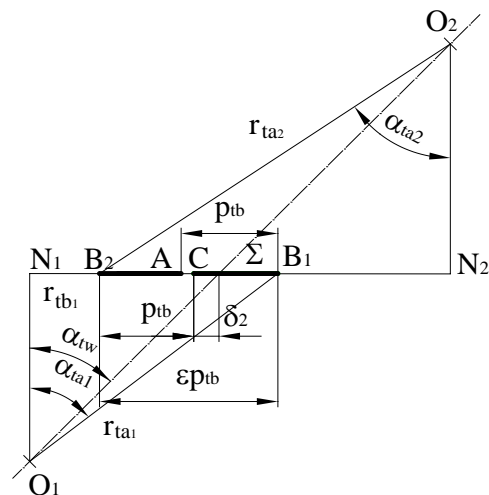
b) at the base of the tooth of wheel – 2 and the head of the tooth of wheel - 1
